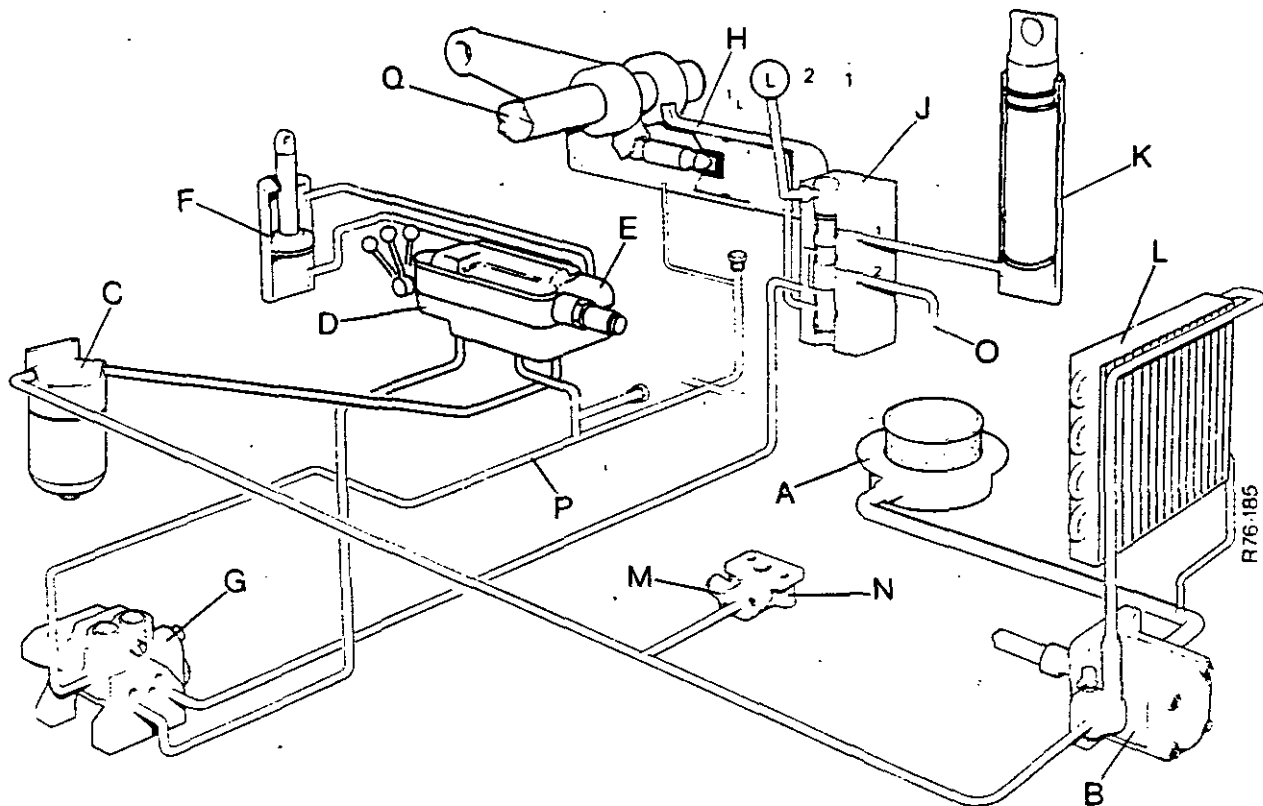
SELECTAMATIC HYDRAULIC SYSTEM FOR TRACTORS WITH SINGLE HYDRAULIC PUMP
